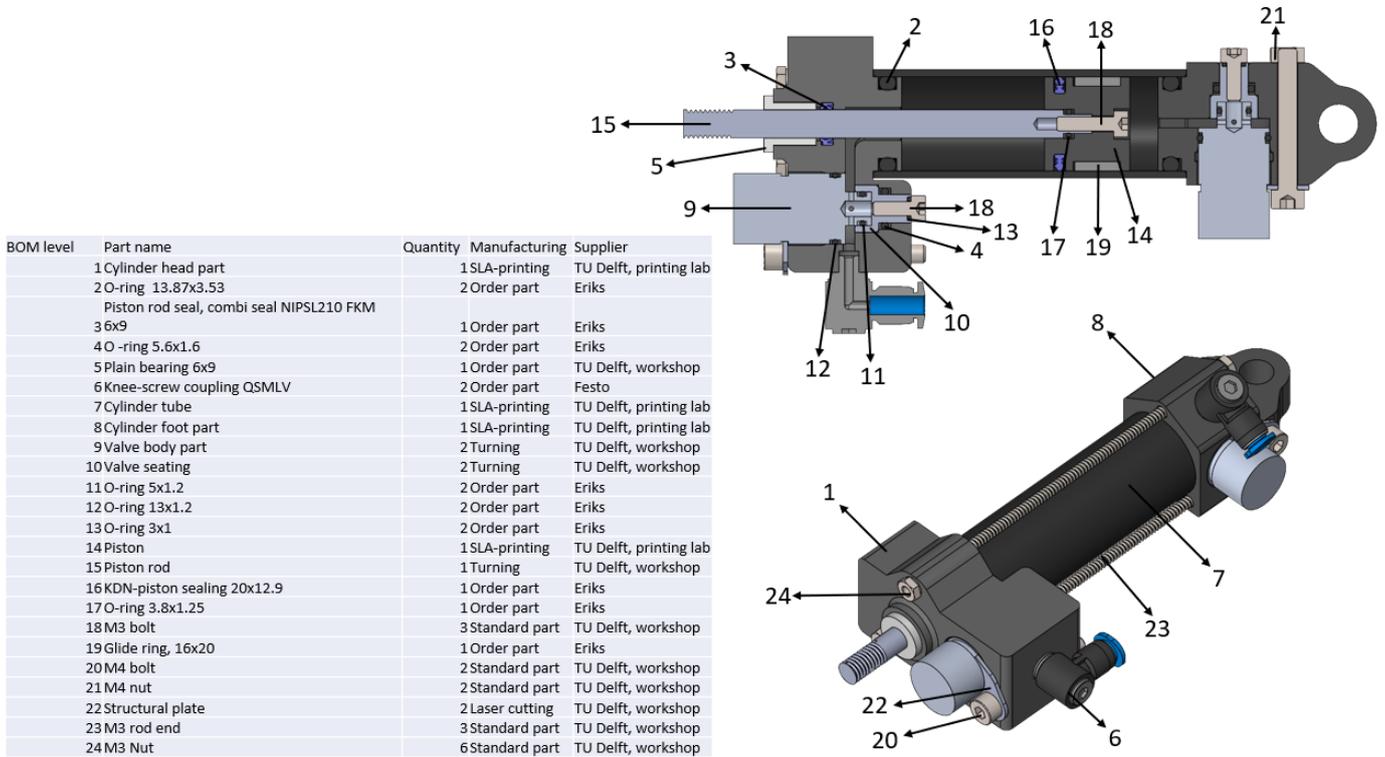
Bill of materials with annotations of the parts in the section view and the isometric view.
